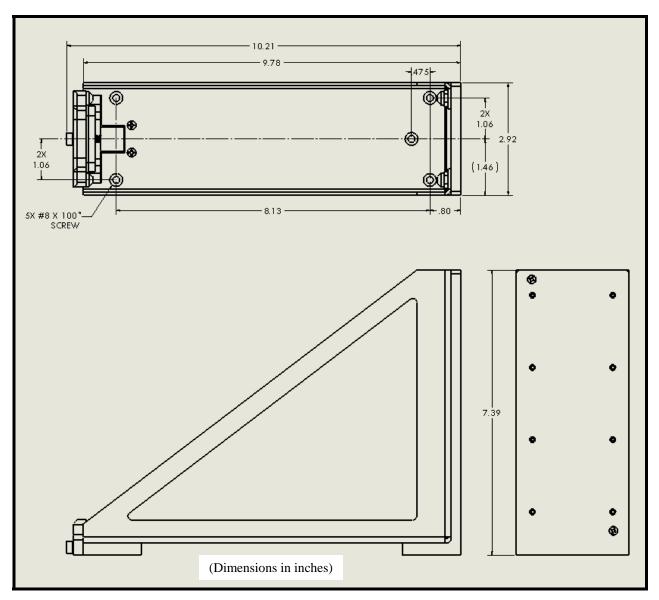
Processor Mounting Tray Hole Pattern for 700-000187-002 tray
